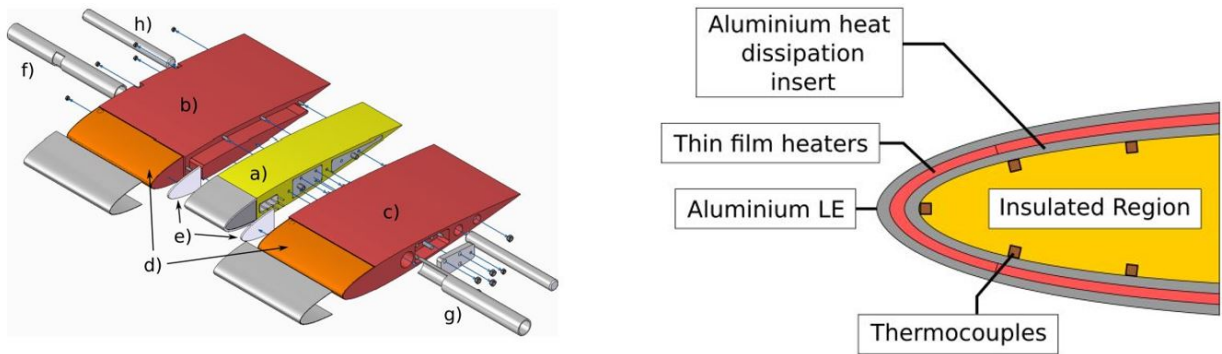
a) NACA0012 Exploded View (Left). b) Cross-sectional details of L.E. of NACA0012 model (Right).
